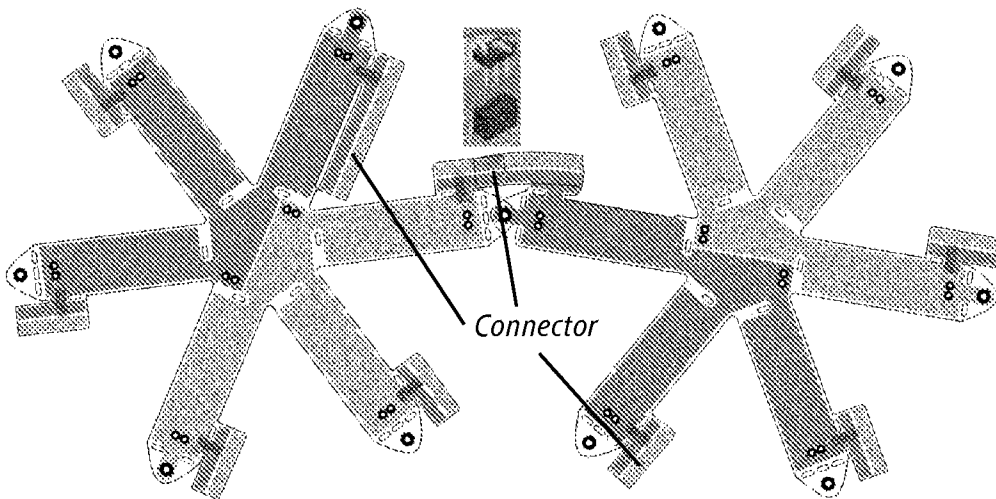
Optical elements attached to an embodiment made of flexible PCB
